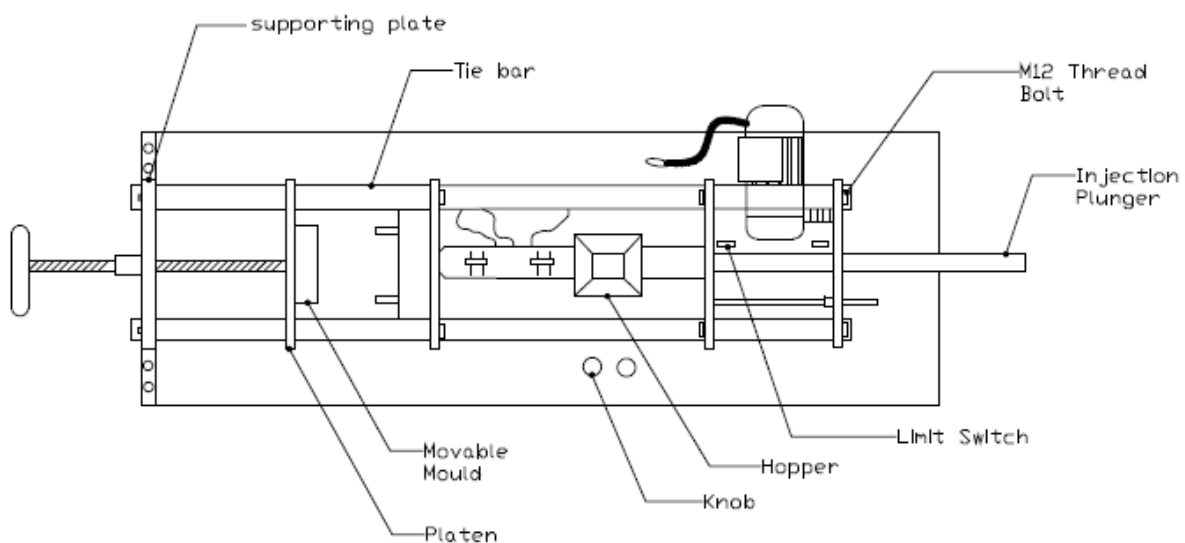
2. Plan view of the injection moulding machine (Oyetunji, 2010).
